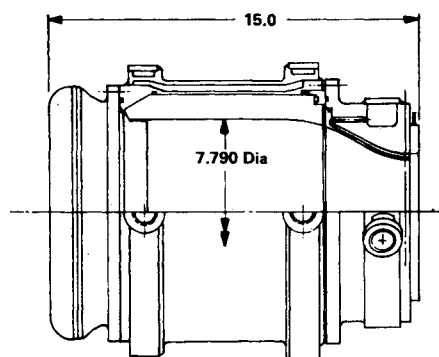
Ablative chamber and water-cooled nozzle assembly.
